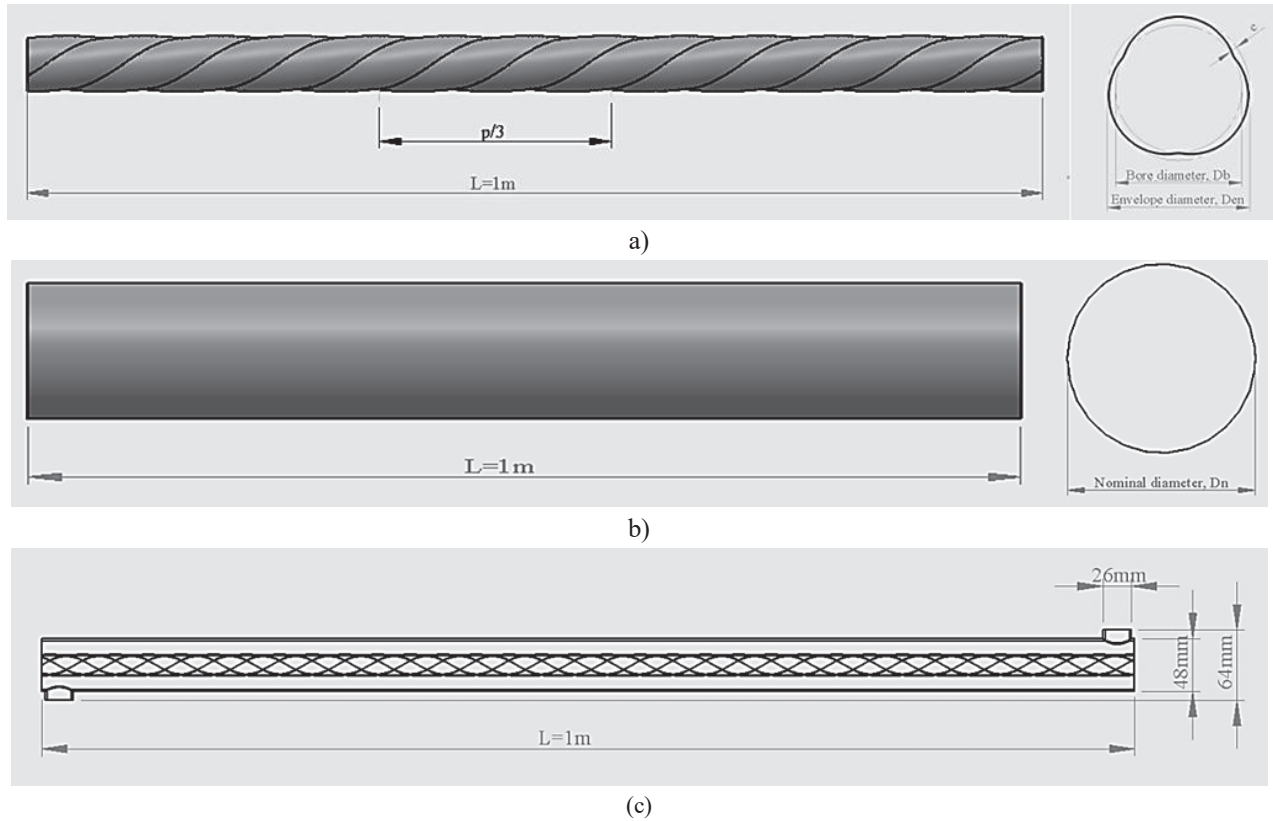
Tube geometry of (a) three-start spirally corrugated tube, (b) smooth tube and (c) arrangement of double pipe heat exchanger
